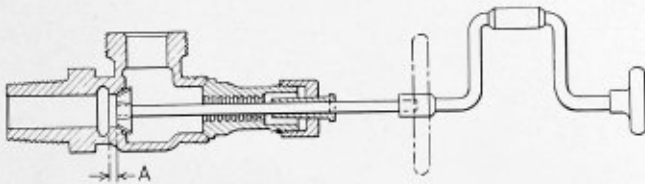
Method of reseating the drain-valve body, using a special reseating tool
